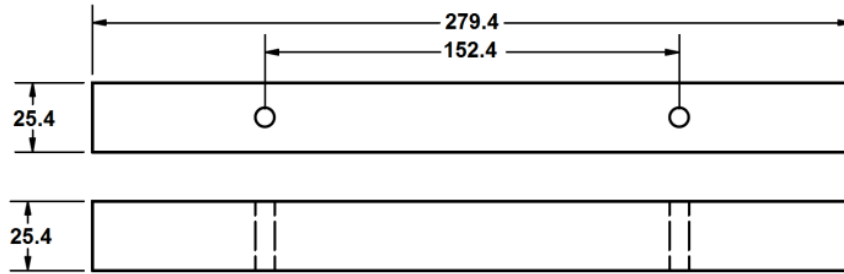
Dimensions (mm) of Constant side wall used in all three cavities
